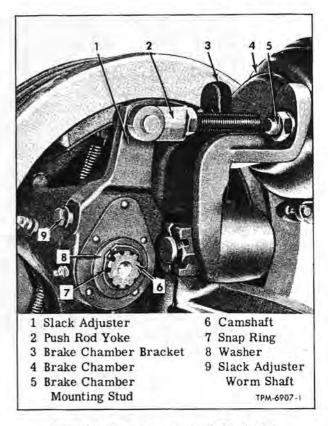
Brake Chamber Bracket and Slack Adjuster Mounted On Front Axle
